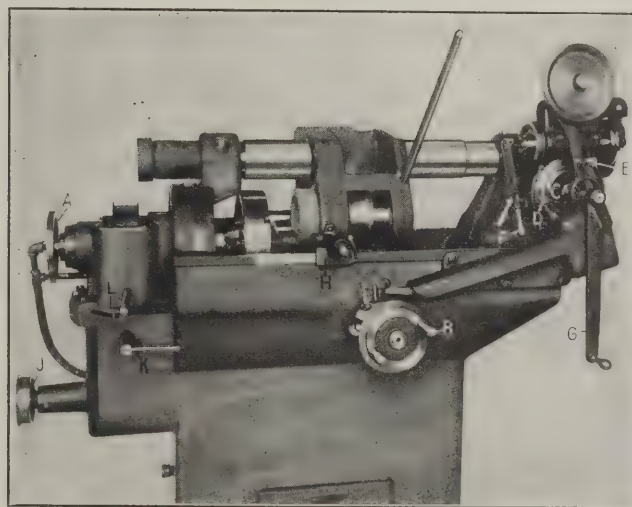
Two-spindle Machine with Wheel-slide set for Face-grinding
